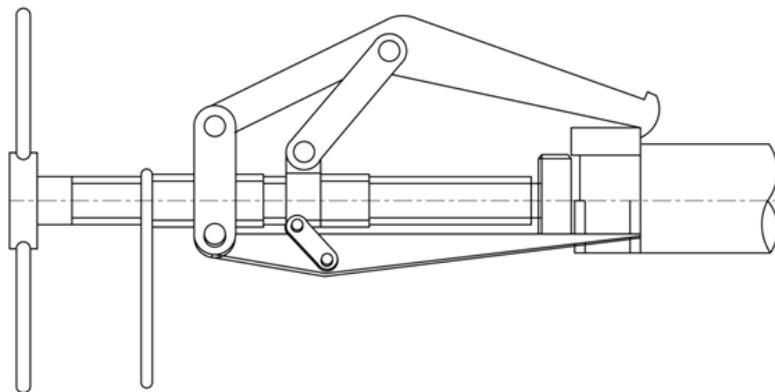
Removal of Inner Ring Using Withdrawal Tool (2)
